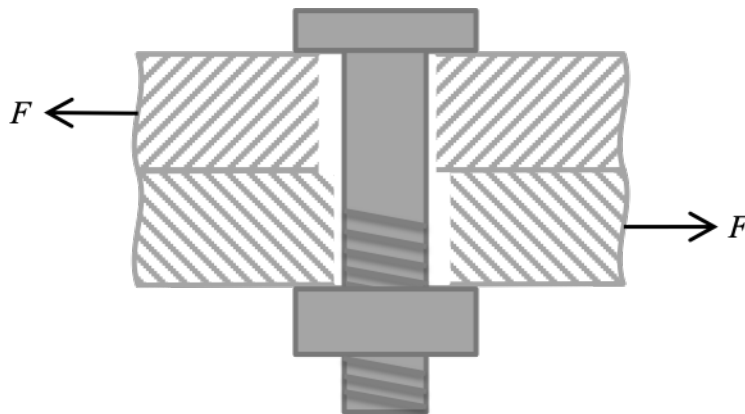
Holes for threaded fasteners are made with clearance for assembly. The clearance leads to eccentricity in the joint.
